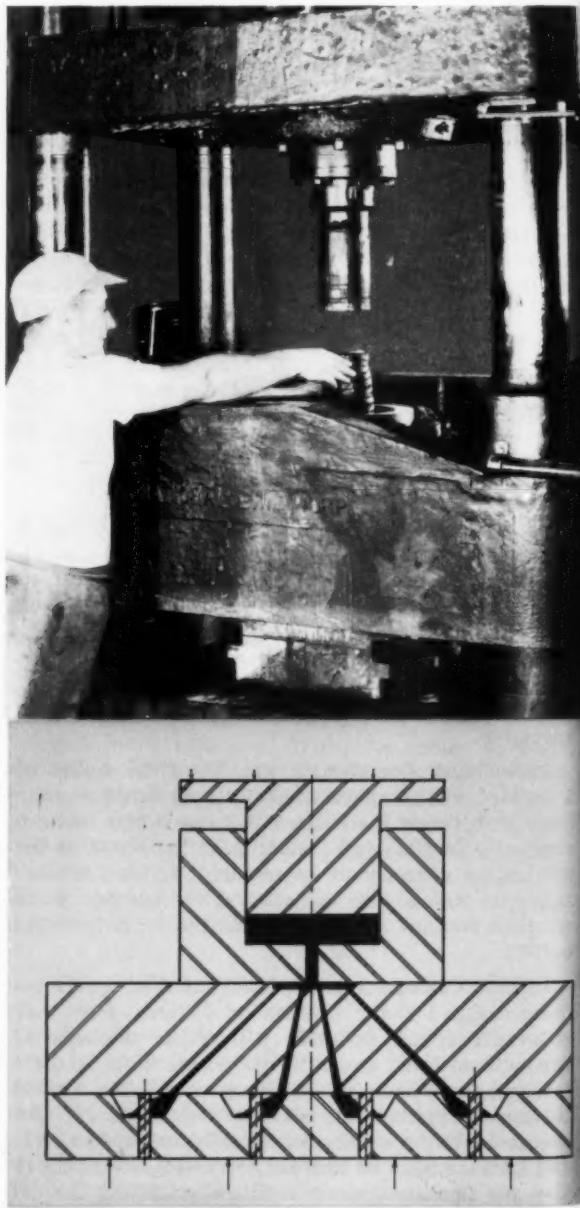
View through a transfer-injection mold, below, and operator shown loading press
